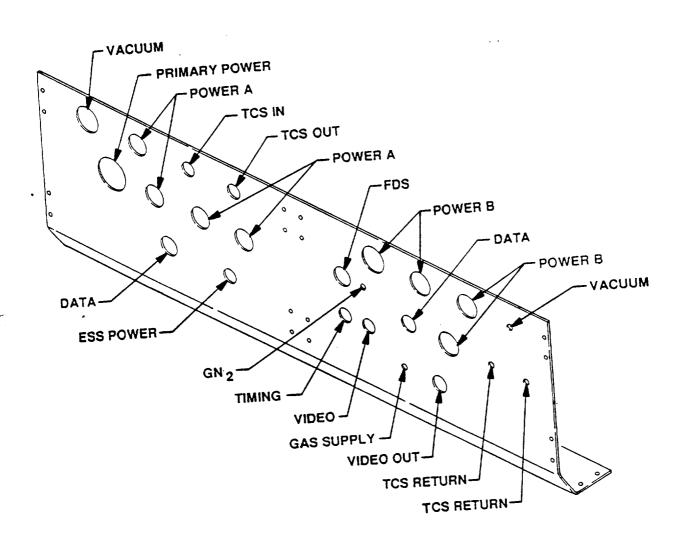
CORE RACK PANEL LAYOUT
